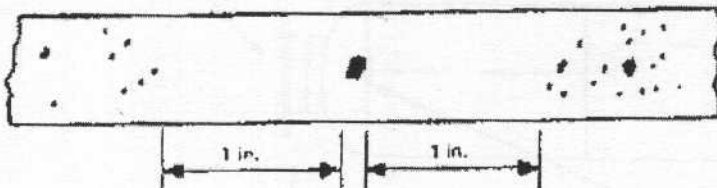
CHARTS FOR t EQUAL TO 1/8 In. to 1/4 In., INCLUSIVE
